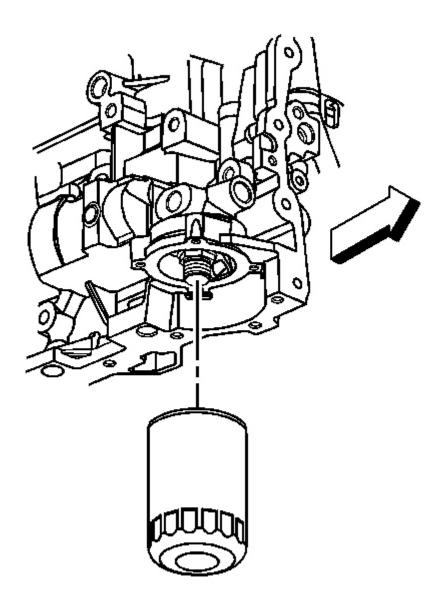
View Of Oil Filter Courtesy of GENERAL MOTORS CORP.
